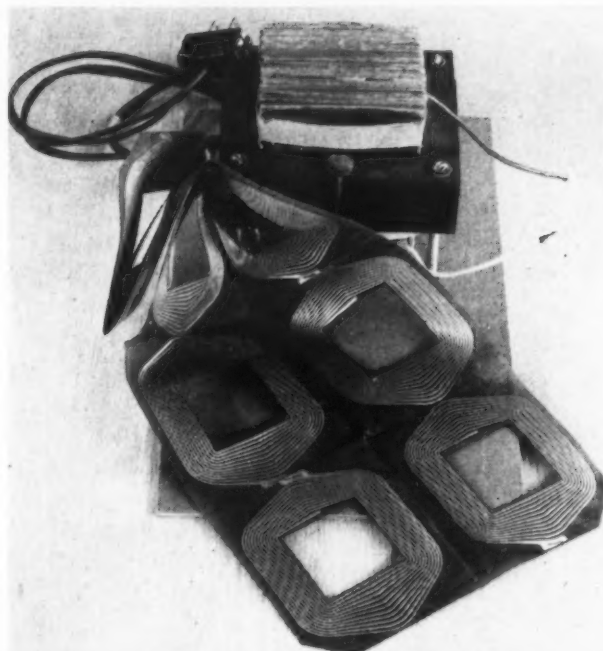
Printed spirals fold up into transformer. (Photo courtesy Technograph Inc.)
